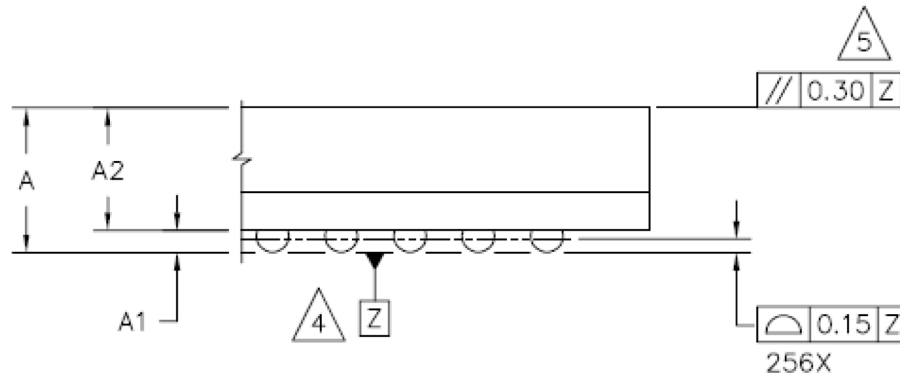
256 I/O STD MAP BGA Package Mechanical Drawing
